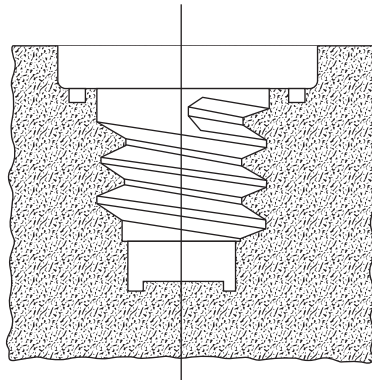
Male thread. If the mating part is to seat properly with its companion plastic part, an annular groove should be provided at the bottom of an externally threaded stud. Also the recess at the base of the thread will allow the thread to end without having a 'feather edge'.
